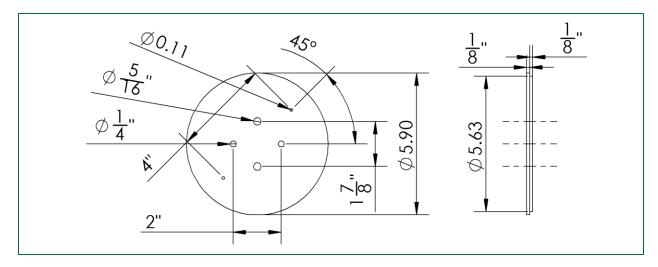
Dimensioned drawing of typical altimeter cap bulkhead.
